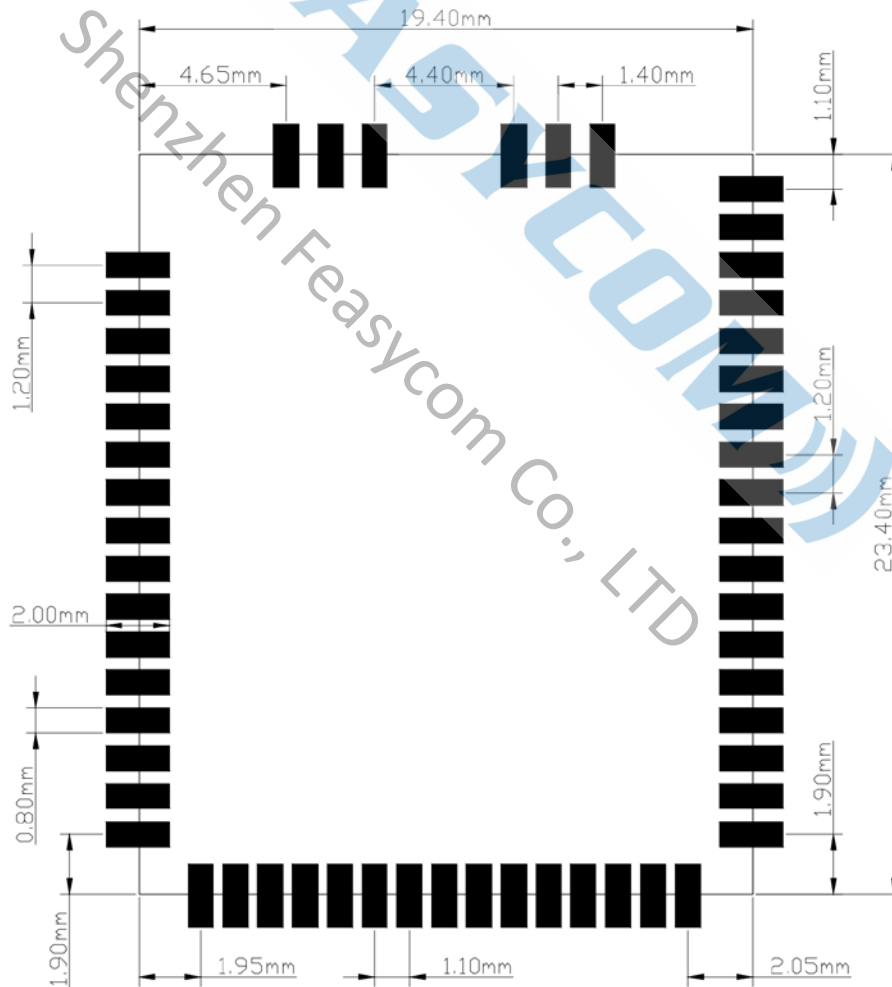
FSC-BW8201SI footprint Layout Guide (Top View)
